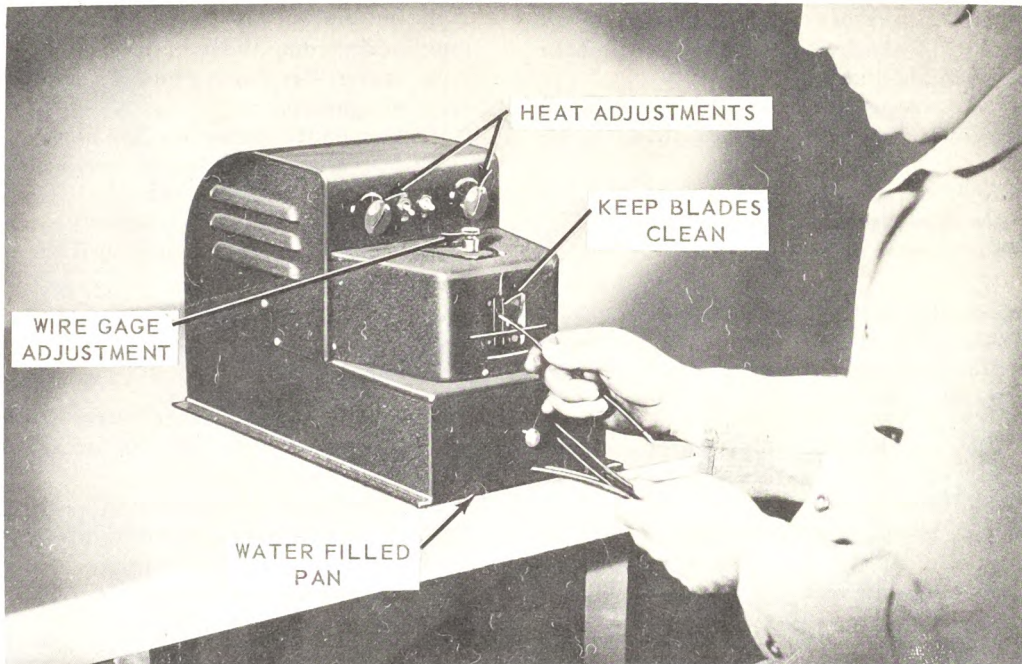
Stripping Wire in a Hot Blade Stripper
